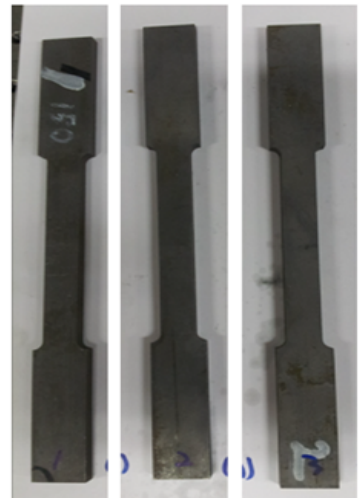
Welded specimen cutting by Electrical Discharge Machining
